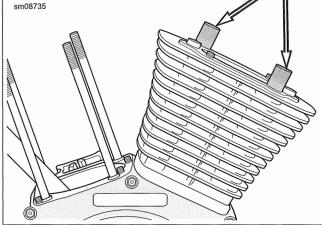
Install Threaded Cylinders to Studs CLEAN AND INSPECT
